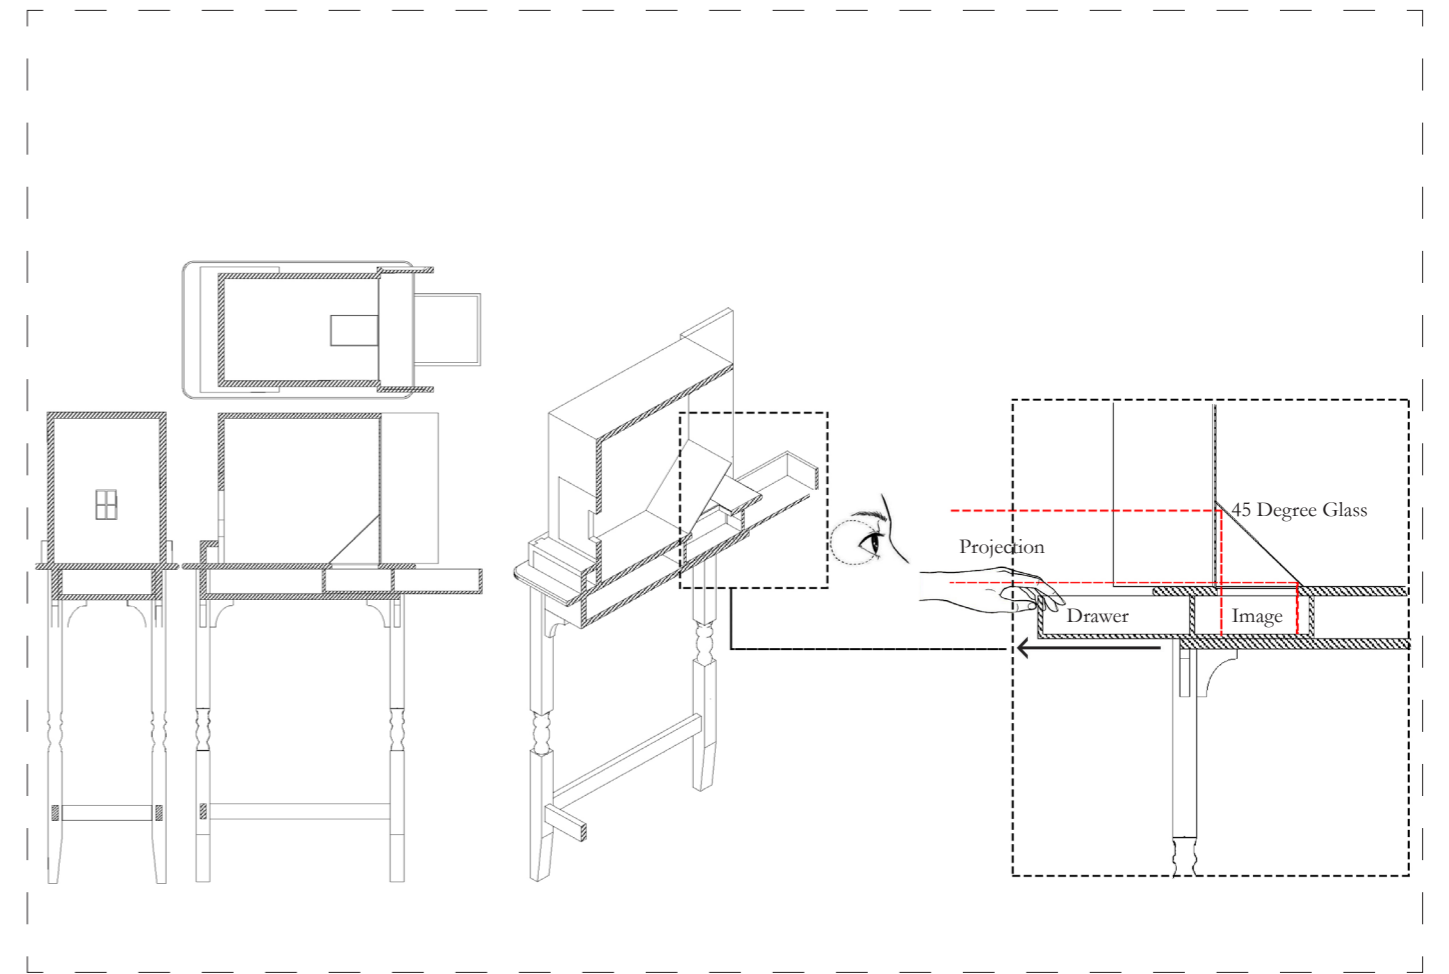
Prasad, S. Plan, Section and Detail Drawing , 2020.
